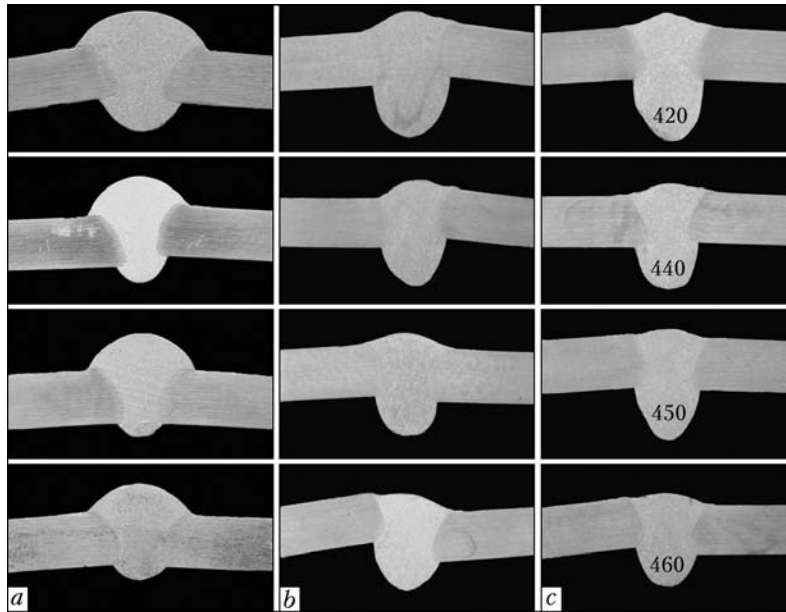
Weld formation, depending on the modes of welding 1915T alloy with 1.2 mm wire with v_w modulation in joints without a gap (a) and with 0.5 (b) and 1 (c) mm gap
